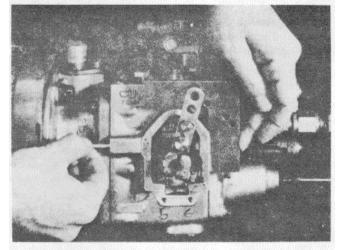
G-83. Adjusting Front Throttle Stop Screw to Set Throttle Travel
